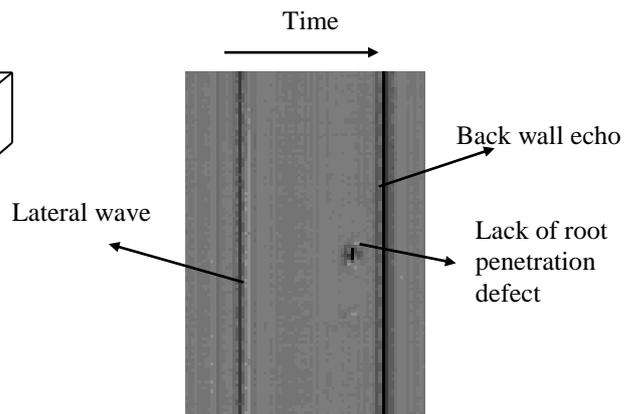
Incomplete root penetration weld defect B scan image.
